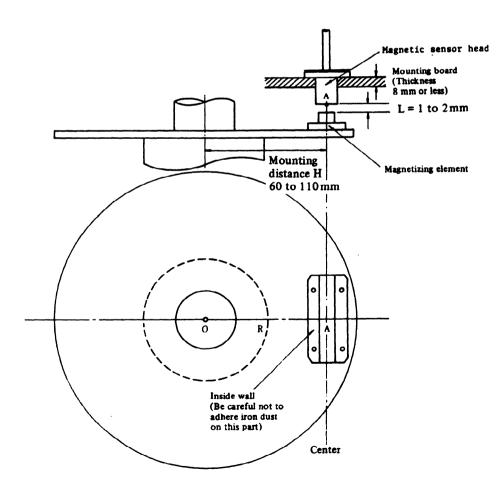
(c) Magnetic sensor mounting example (3) (When mounted on disk)
